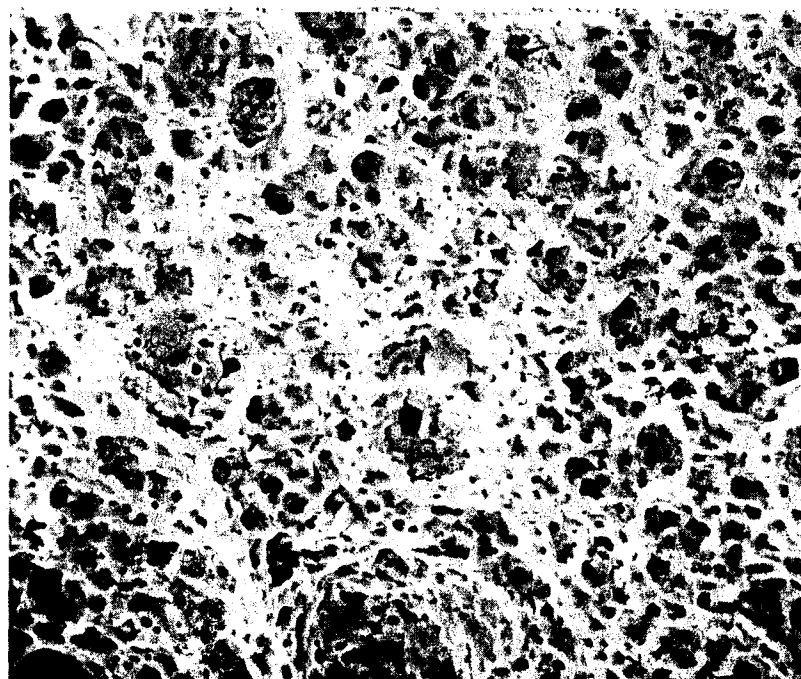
APPEARANCE OF THE FRACTURE SURFACE IN AREA 3 ON THE FRACTURE THROUGH THE MIDDLE STIFFENER RING
